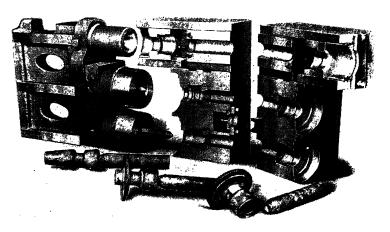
Complicated sliding die and work sample. The forging is for a transmission. (National Machinery Co.)
